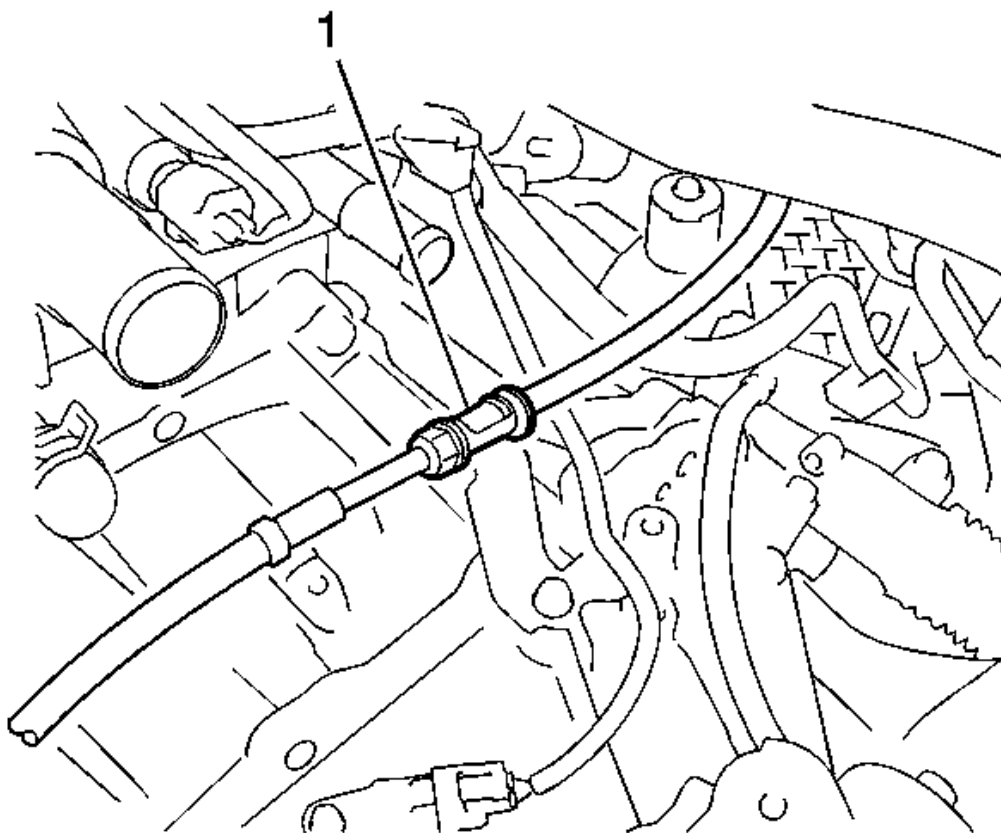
Identifying Automatic Transmission Shift Control Cable
